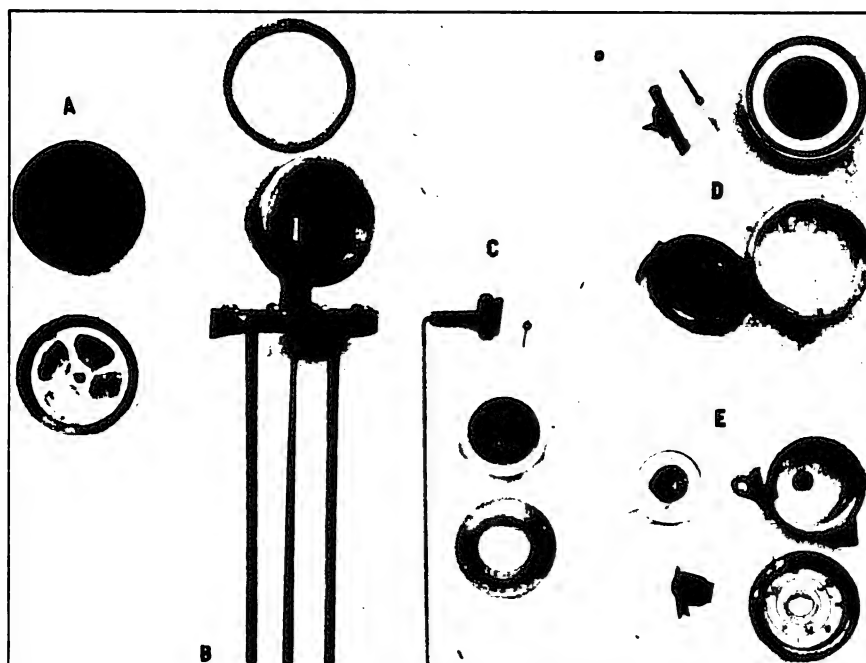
Float Type Gasoline Depth Gages Disassembled.
